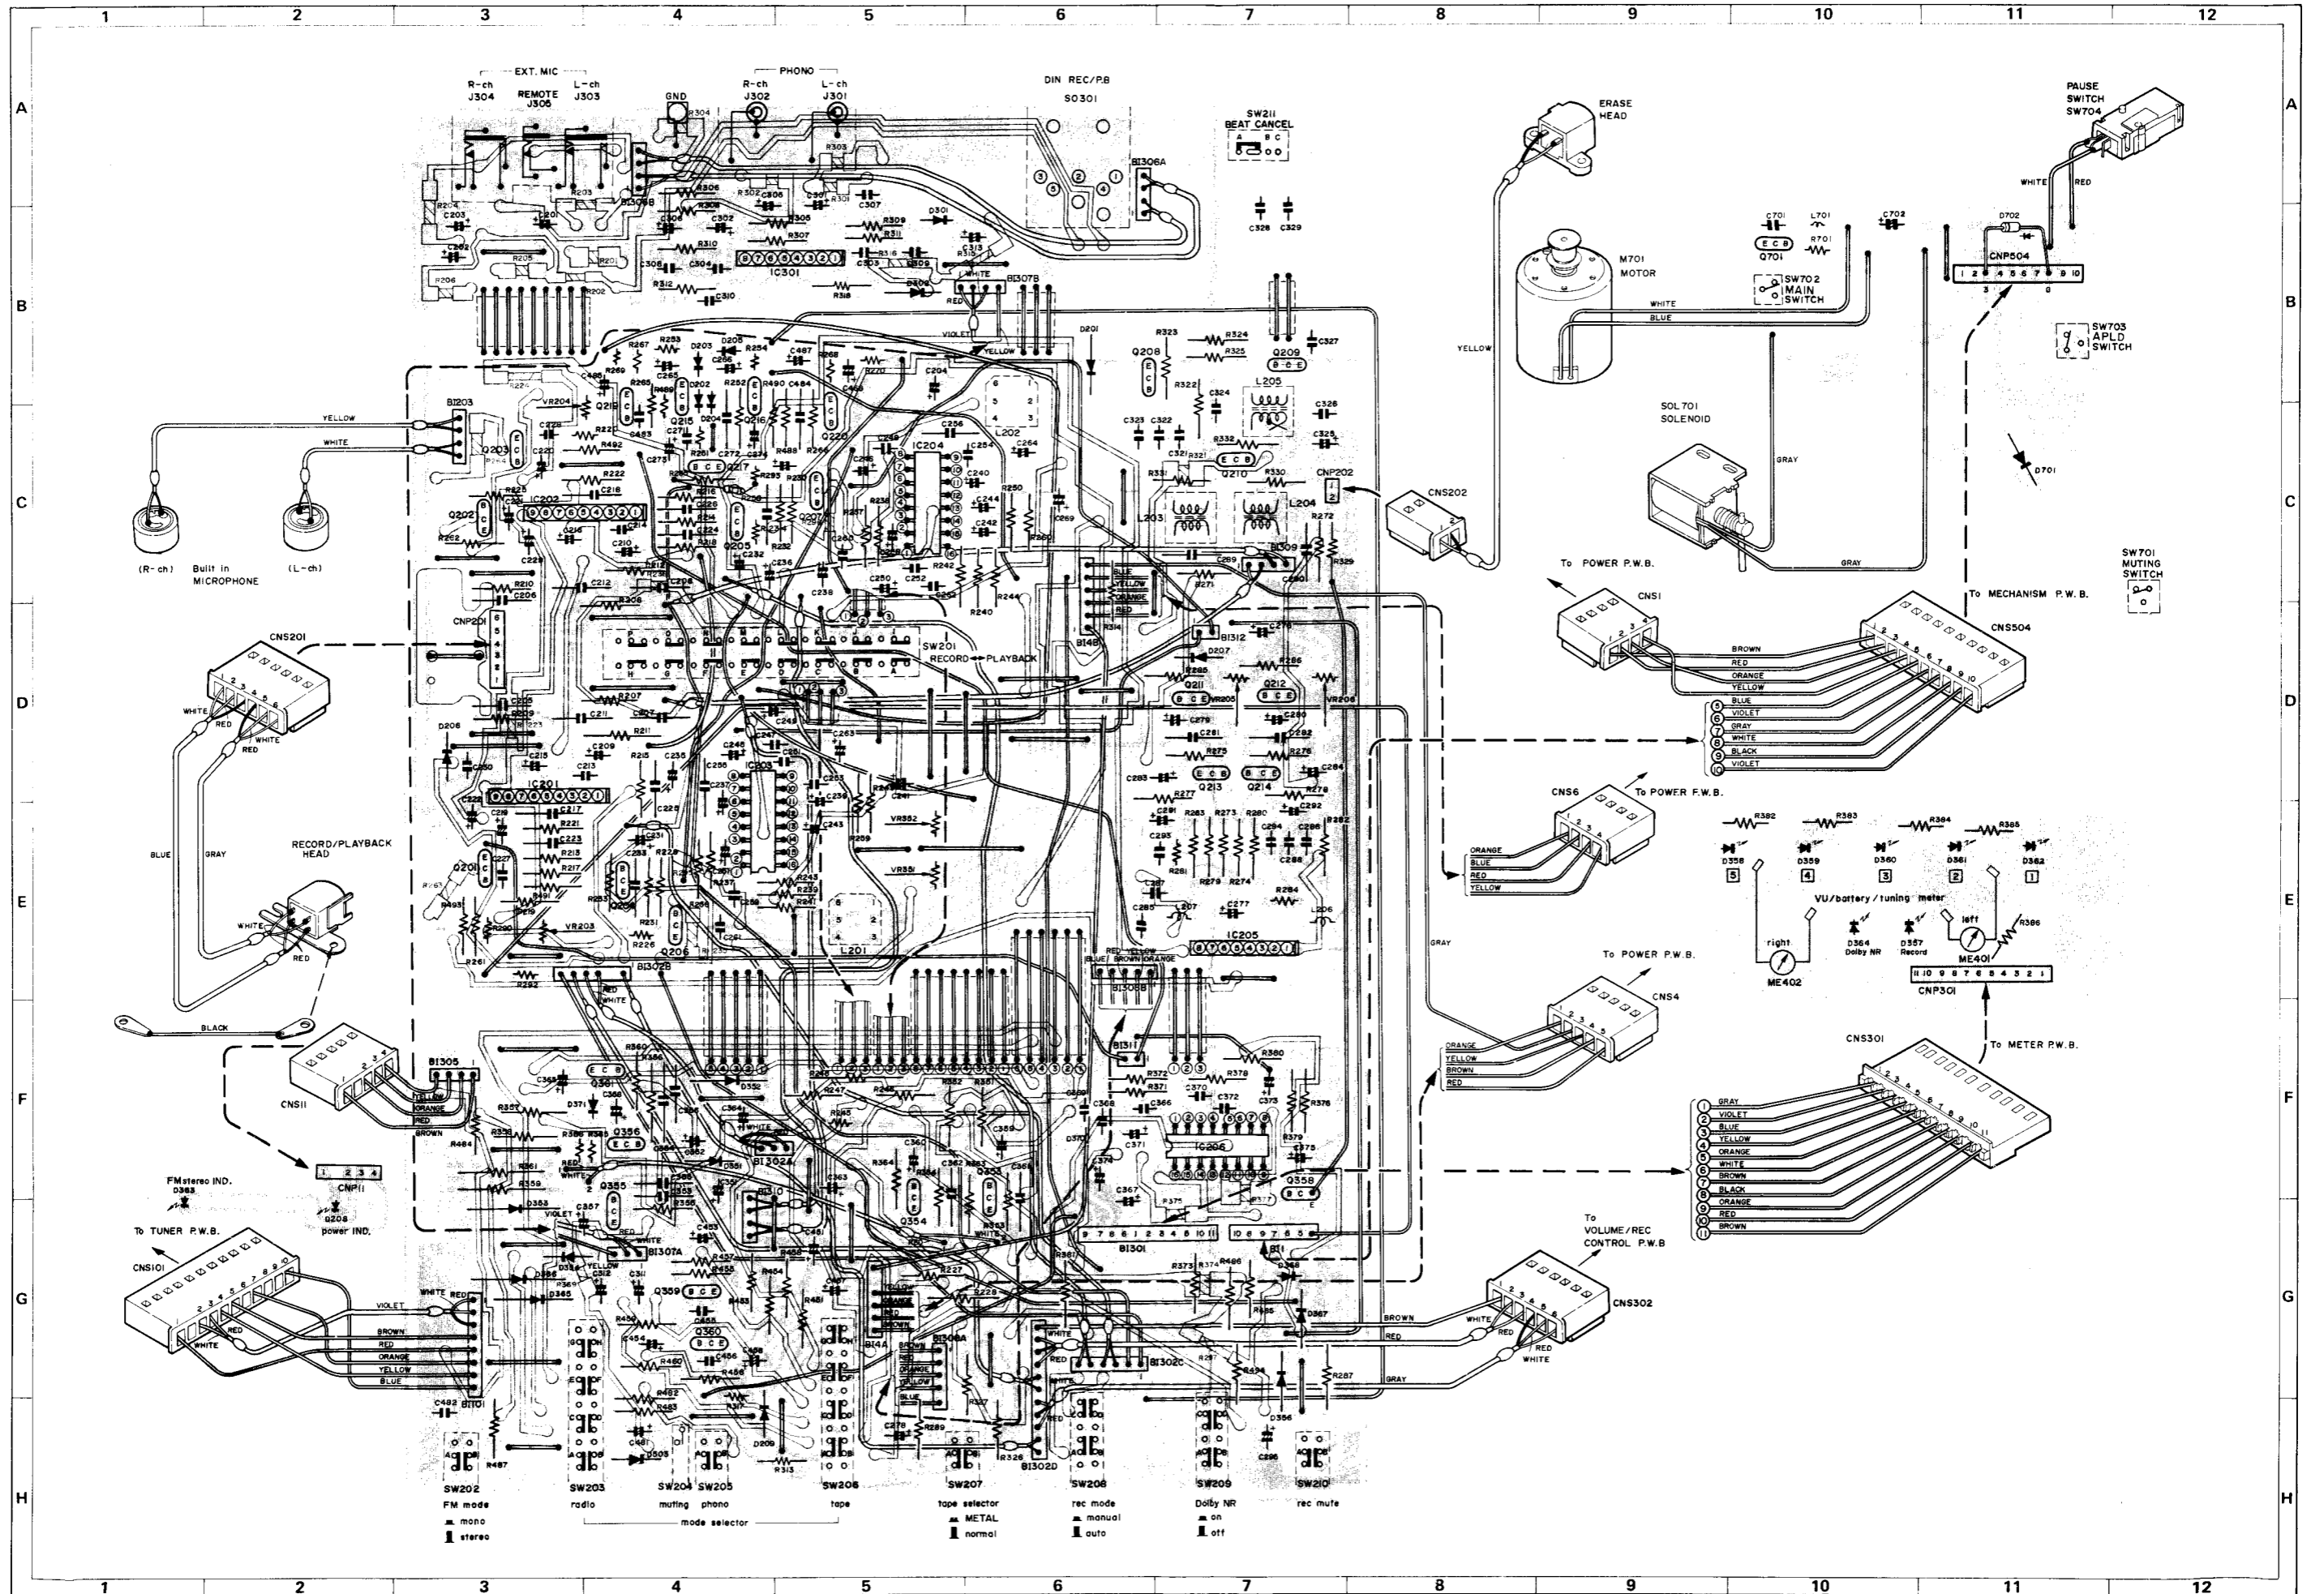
WIRING SIDE OF PRINTED WIRING BOARD (1/3)
